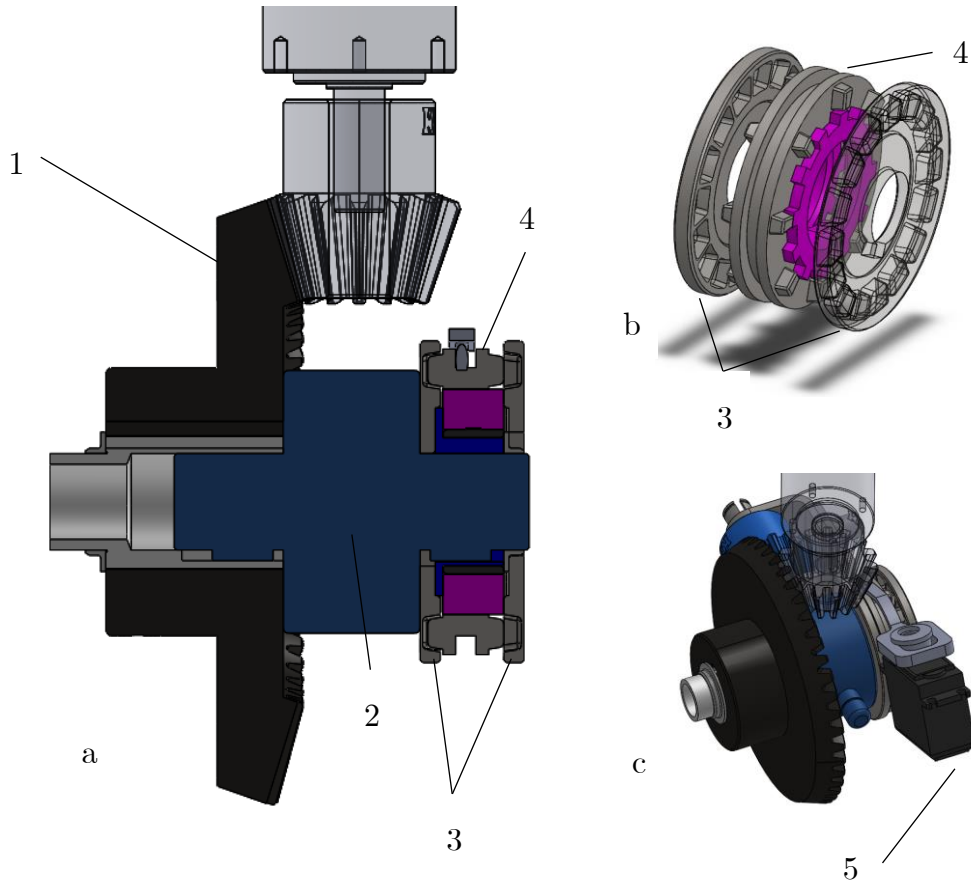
Device elbow FE and forearm PS selector parts. (1) bevel gear, (2) torque transducer, (3) engagement plates, (4) selector plate, (5) servo. a. Cross section view of the selector mechanism; b. Positive engagement clutch mechanism; c. Servo motor actuates the selector
